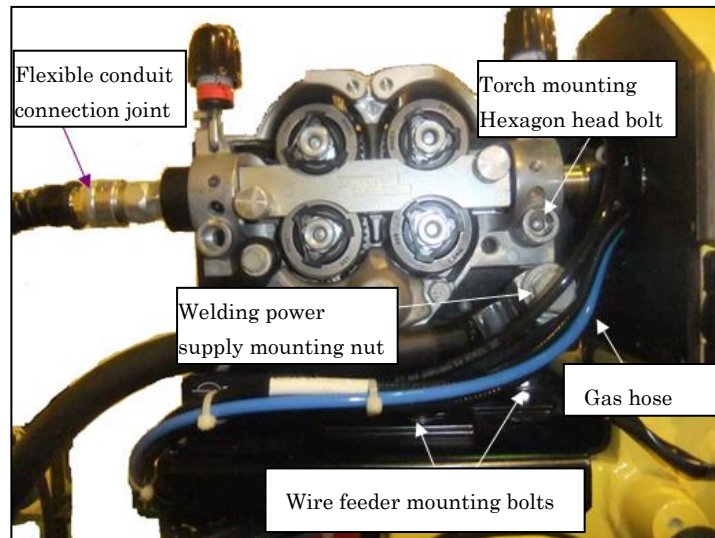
(a) Replacing the wire feeder (1/2)
